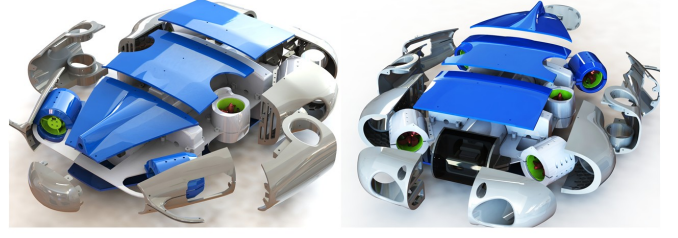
Whale-shark-inspired modular hull in exploded view, showing the split body panels and removable fairings
